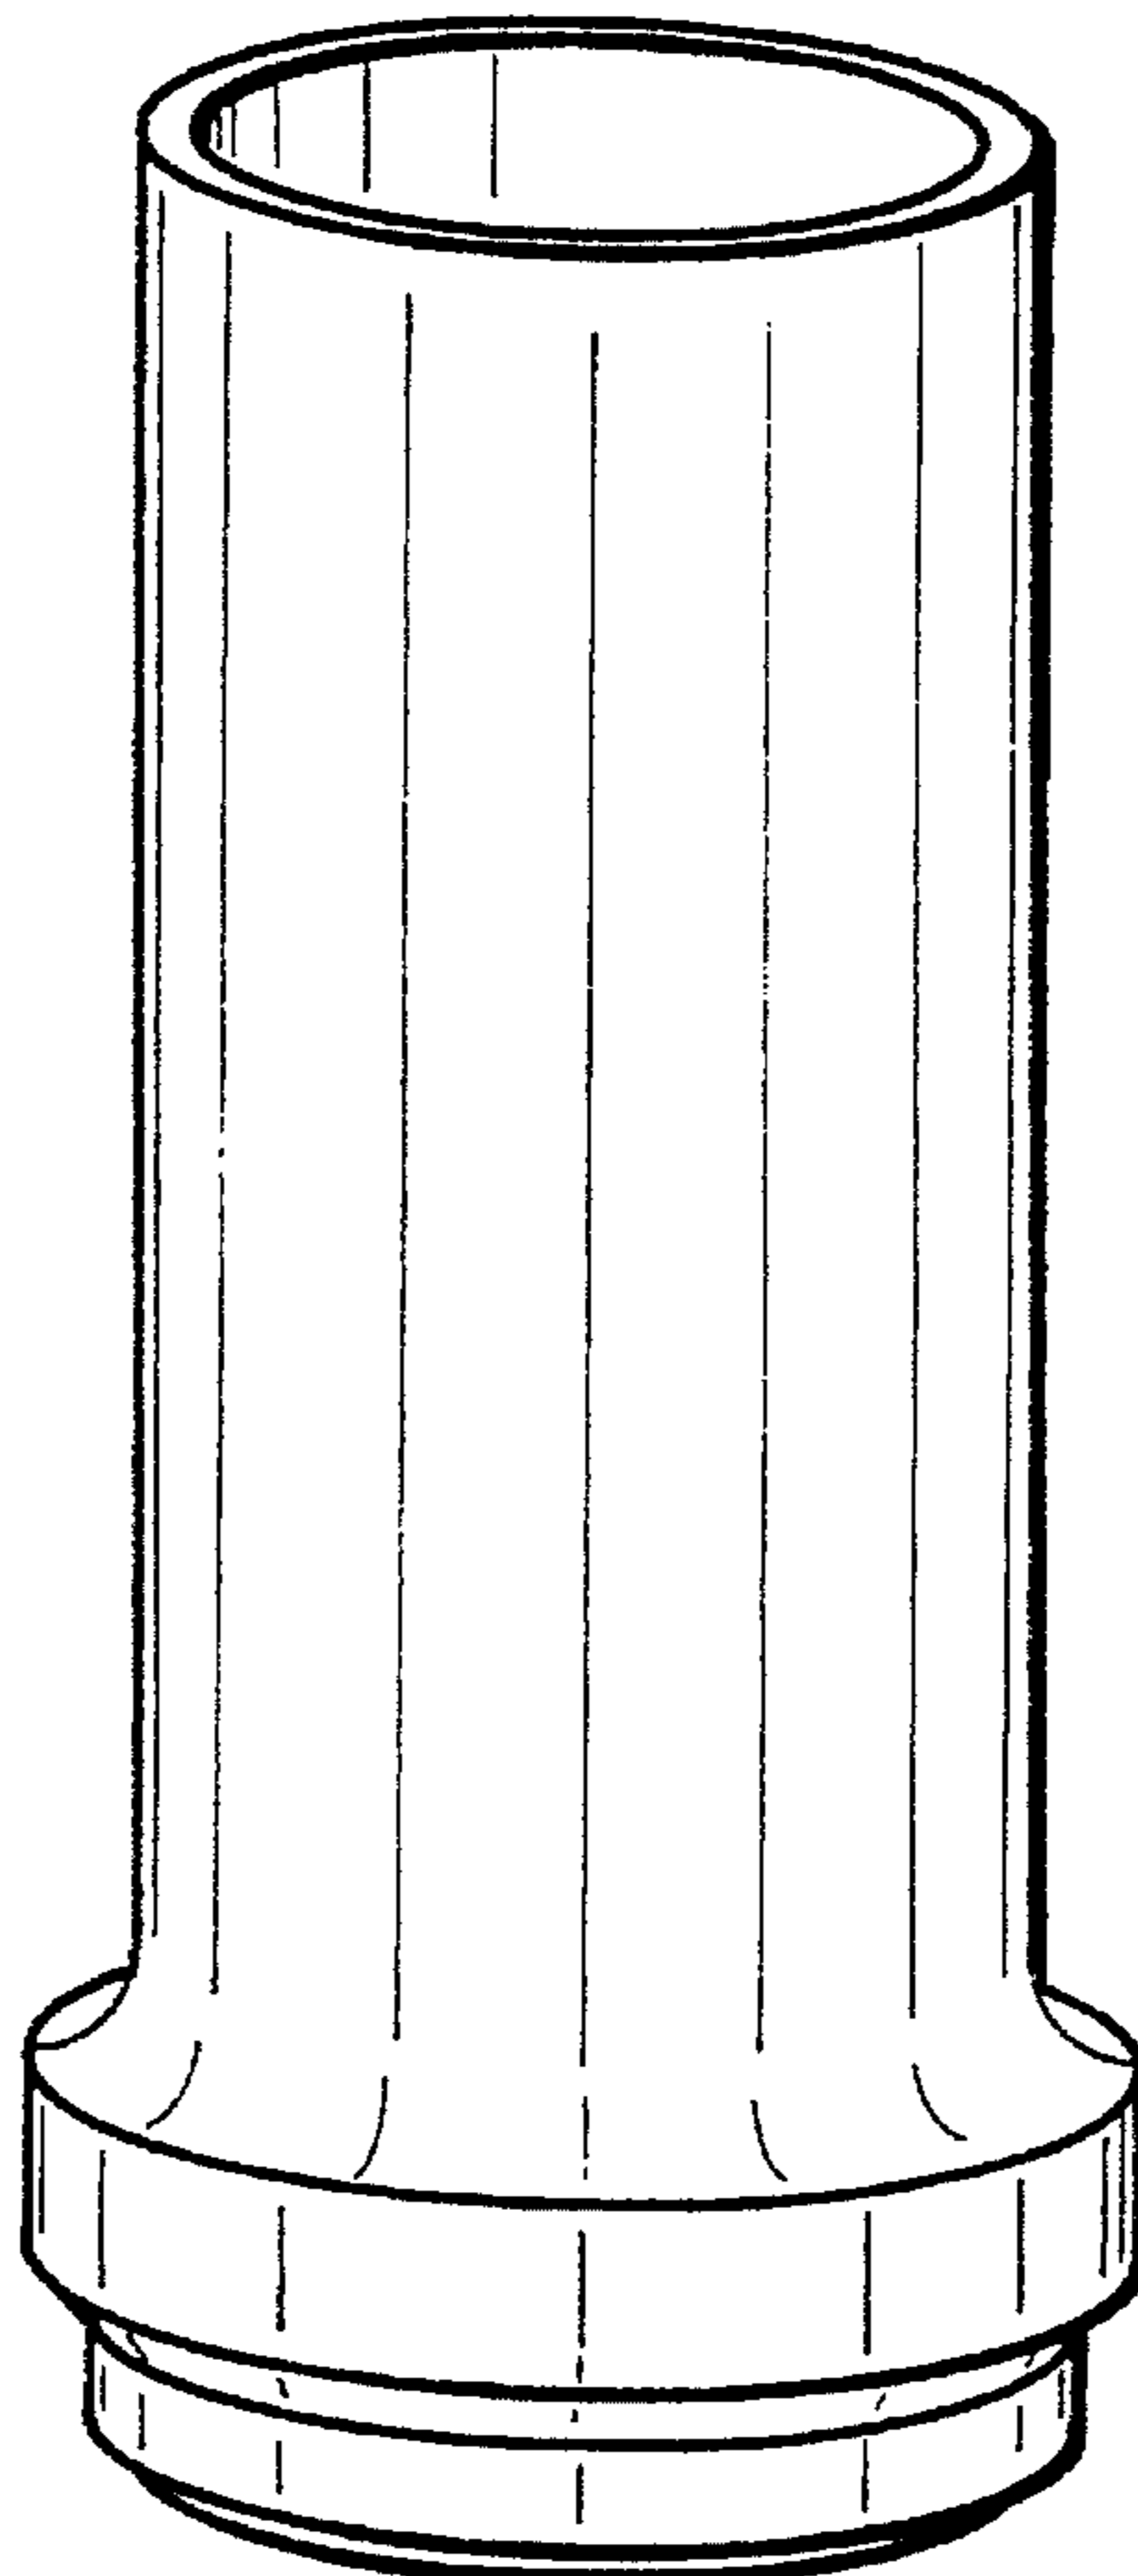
is a top perspective view of a welding outlet, showing
